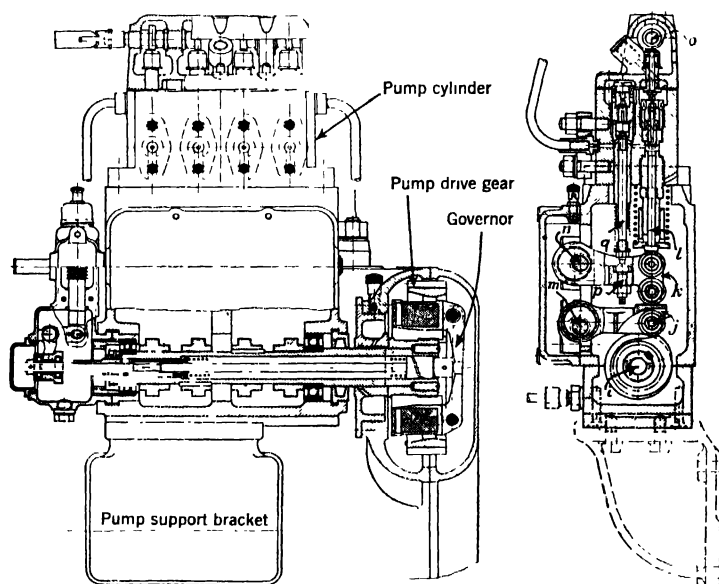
Sectional Drawing Showing the Construction of a Fuel Pump Serving a Four-Cylinder Automotive Diesel Engine. Note Engine Governor Mounted in Oil Pump Drive Gear.
